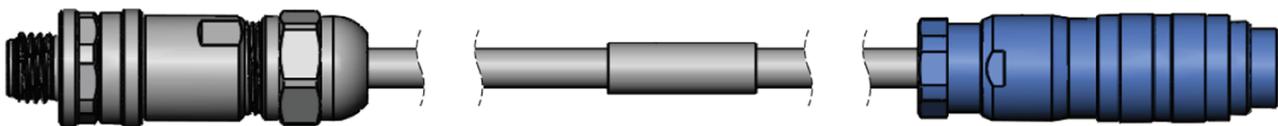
VitalyX PS Drop Cable Assembly (OS-05-04-78)
